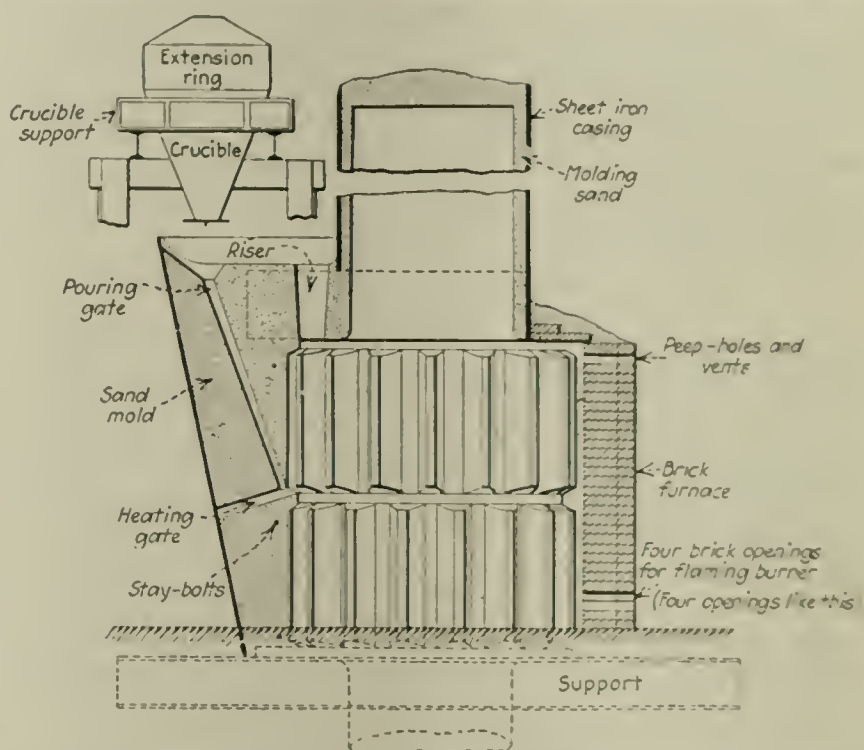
ASSEMBLY OF EQUIPMENT FOR REPLACING BROKEN TOOTH ON A HEAVY PINION BY THERMIT WELDING
